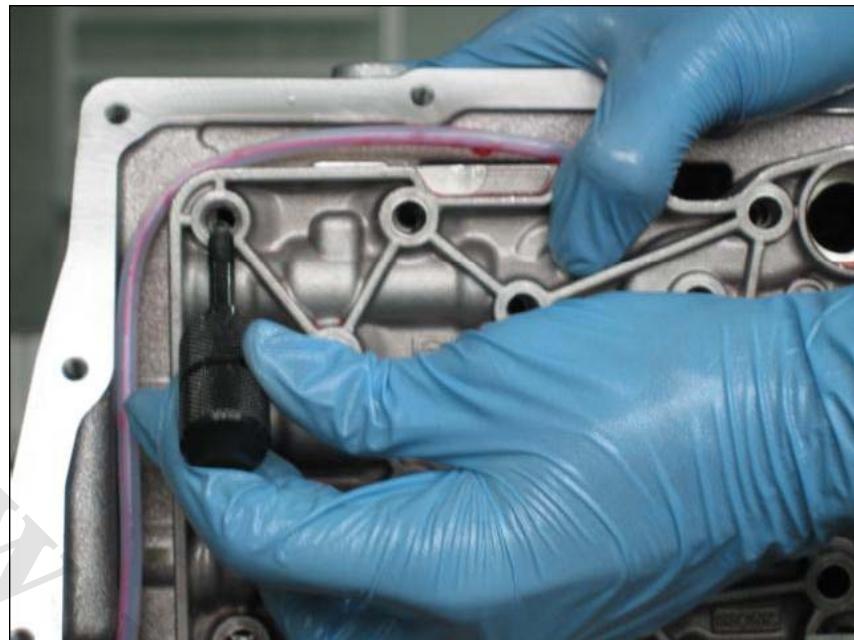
Special tool (23K002-099-84312) fixes hydraulic control block
